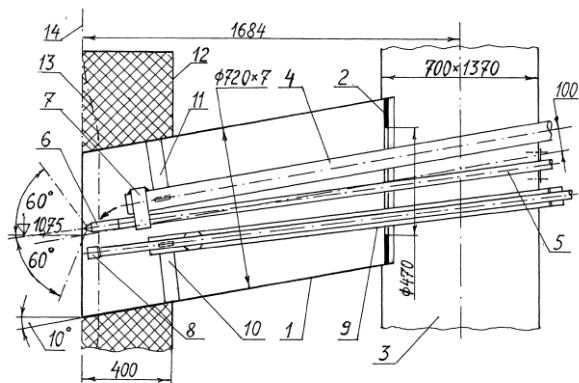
Dust-oil direct-flow burner: 1 — body; 2 — restrictive washer; 3 — air box; 4 — pipe of high-concentration dust (HCD) of 89×6 mm; 5 — pipe of the compressed air of 42×5 mm; 6 — pneumatic jet spreading orifice; 7 — yoke; 8 — head of steam-mechanic sprayer; 9 — sprayer pipe; 10 — plates of sprayer pipe fixing; 11 — plates of HCD pipe fixing; 12 — throat box; 13 — screen pipes parted inside the throat; 14 — axis of the screen pipes.
